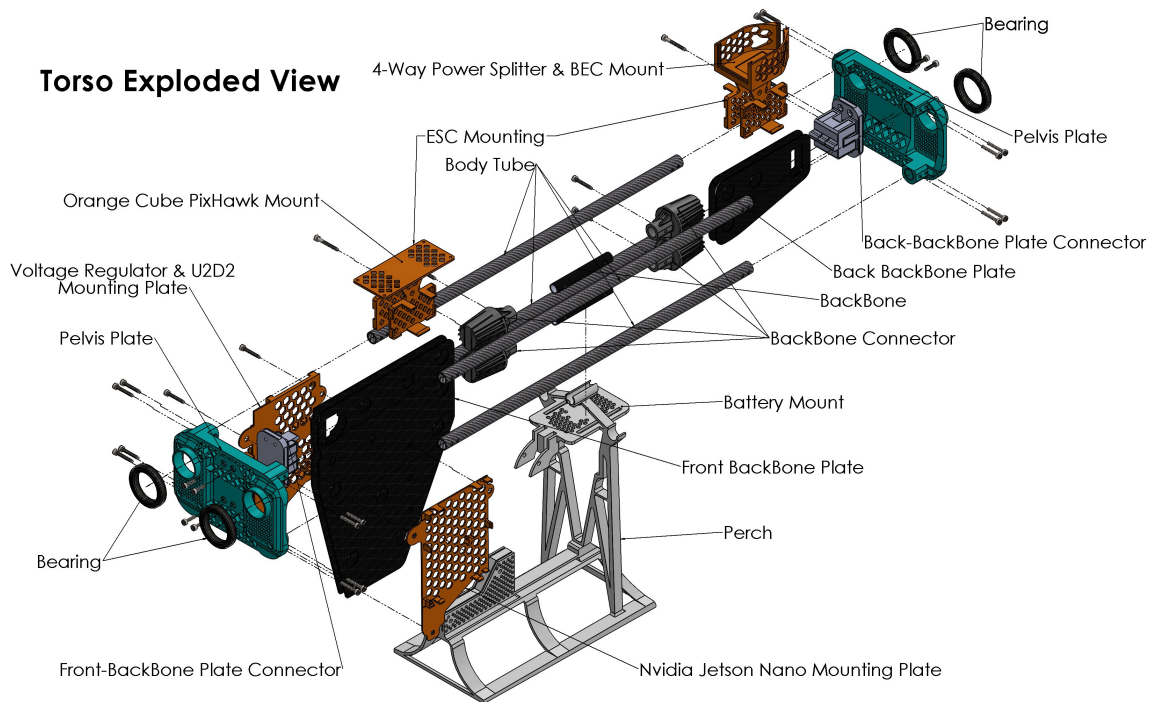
Shows the exploded view of new assembled torso without electronics.
